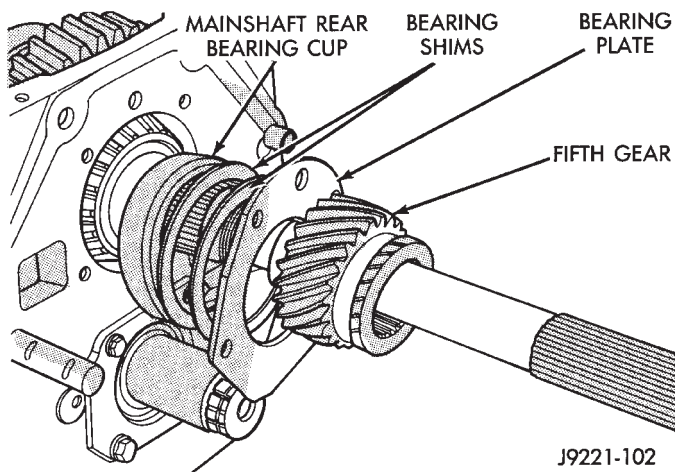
Removing Mainshaft Fifth Gear Bearing Plate, Bearing Shims, And Rear Bearing Cup
